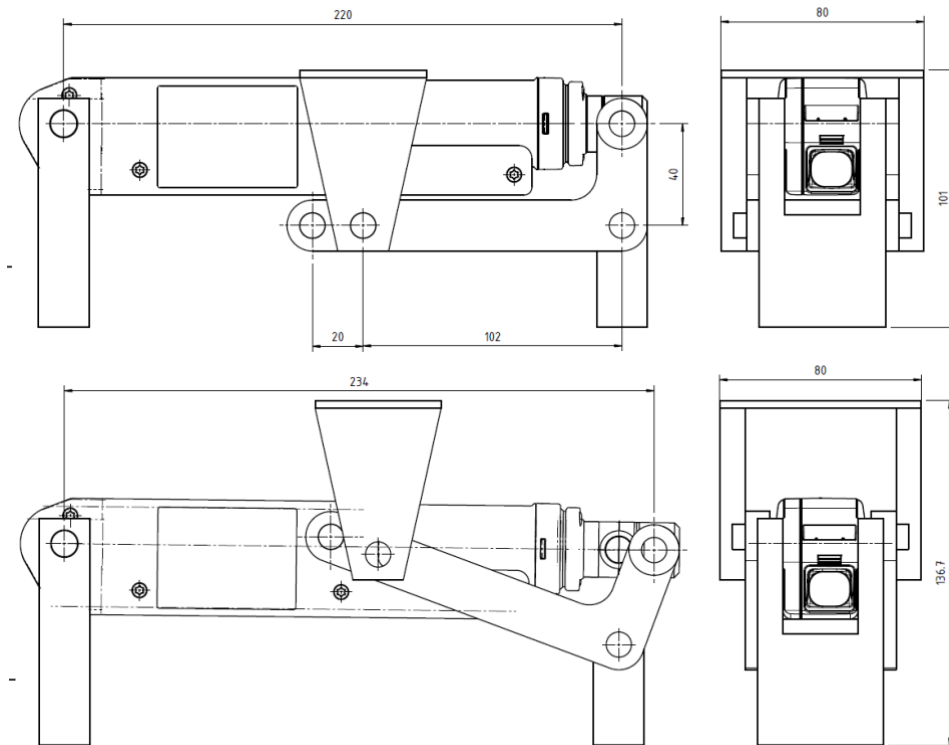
Illustration of Electric Linear Actuator lifting mechanism dimension
